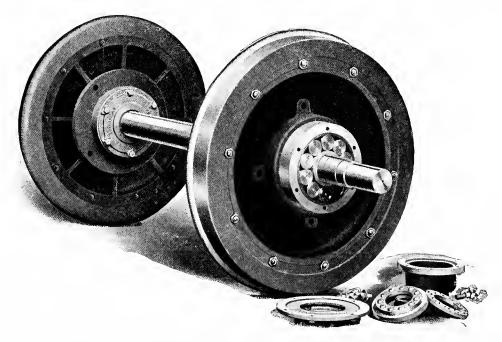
Wheels Mounted on Non-Rotating Axle with Detachable Rollway Hubs and Roller Bearings.
